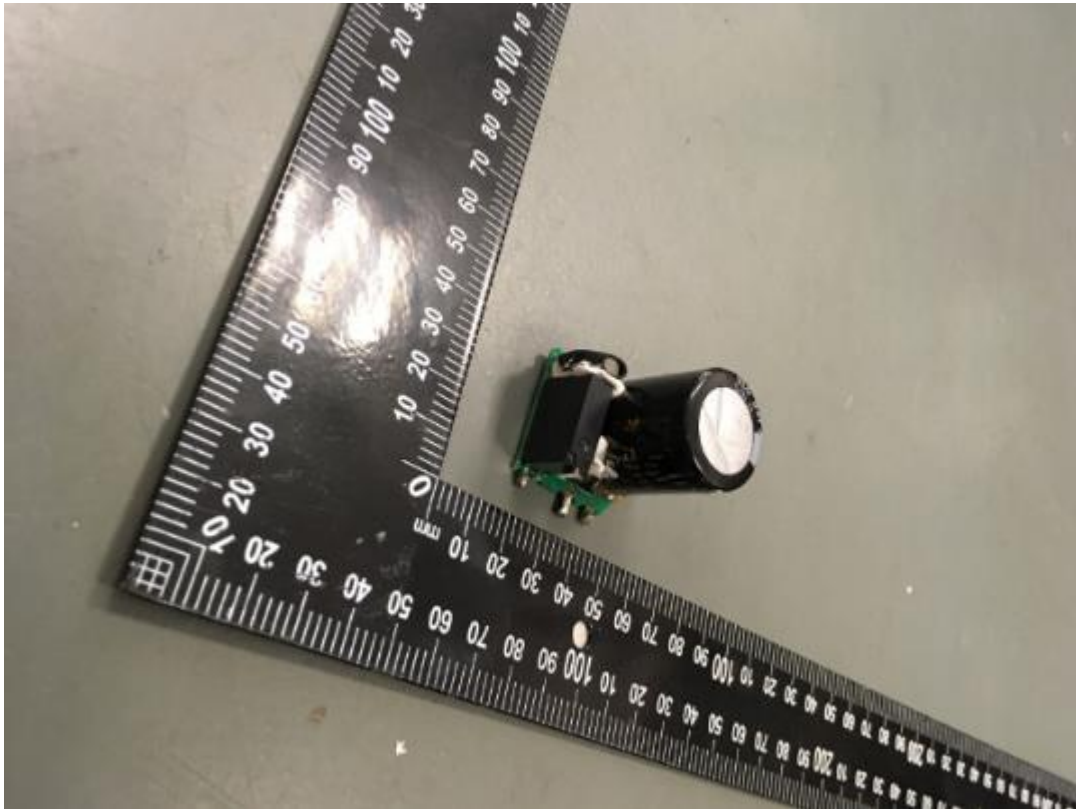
PWB view of BDA1500 PCB PRI_CNTL
